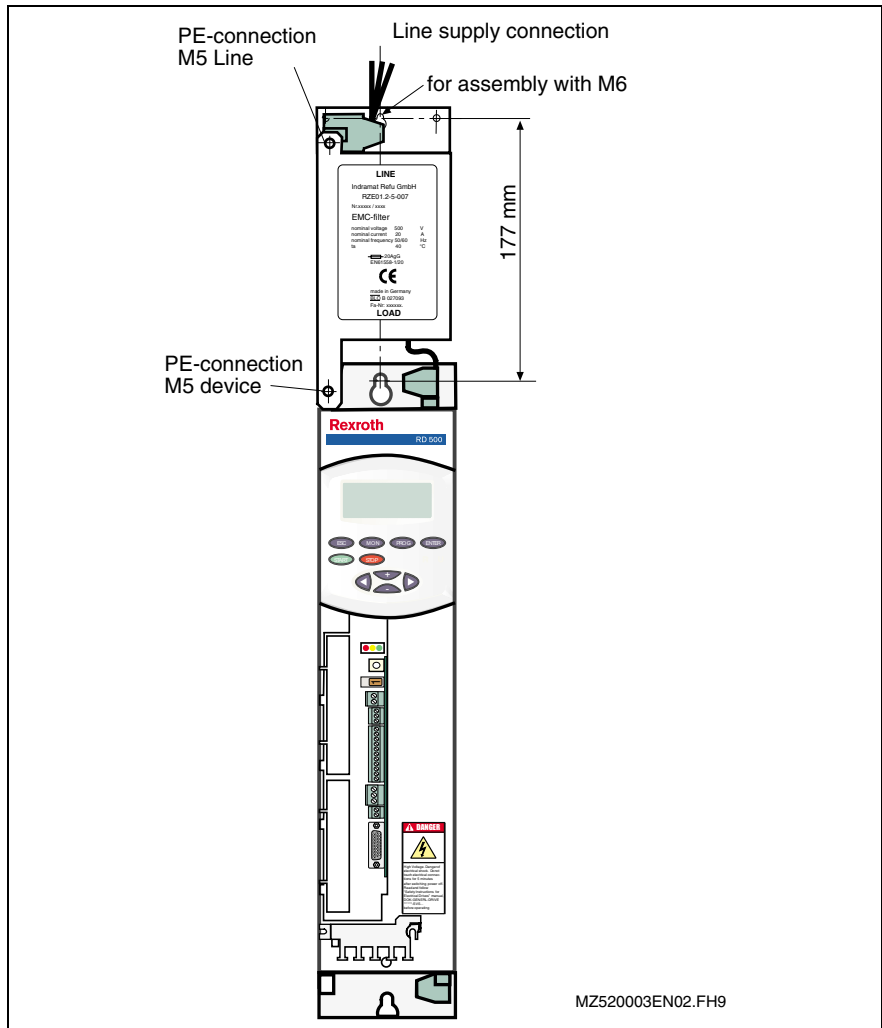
Assembly example for EMC filter RZE01.2 / RZE02.1
